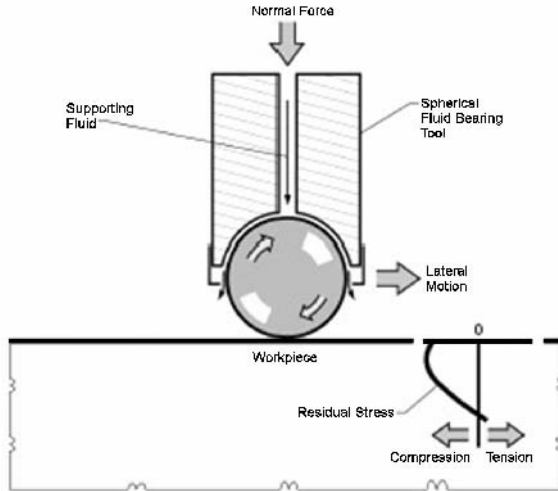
Schematic of low plasticity burnishing (LPB) fixture containing the ball [3.62]
